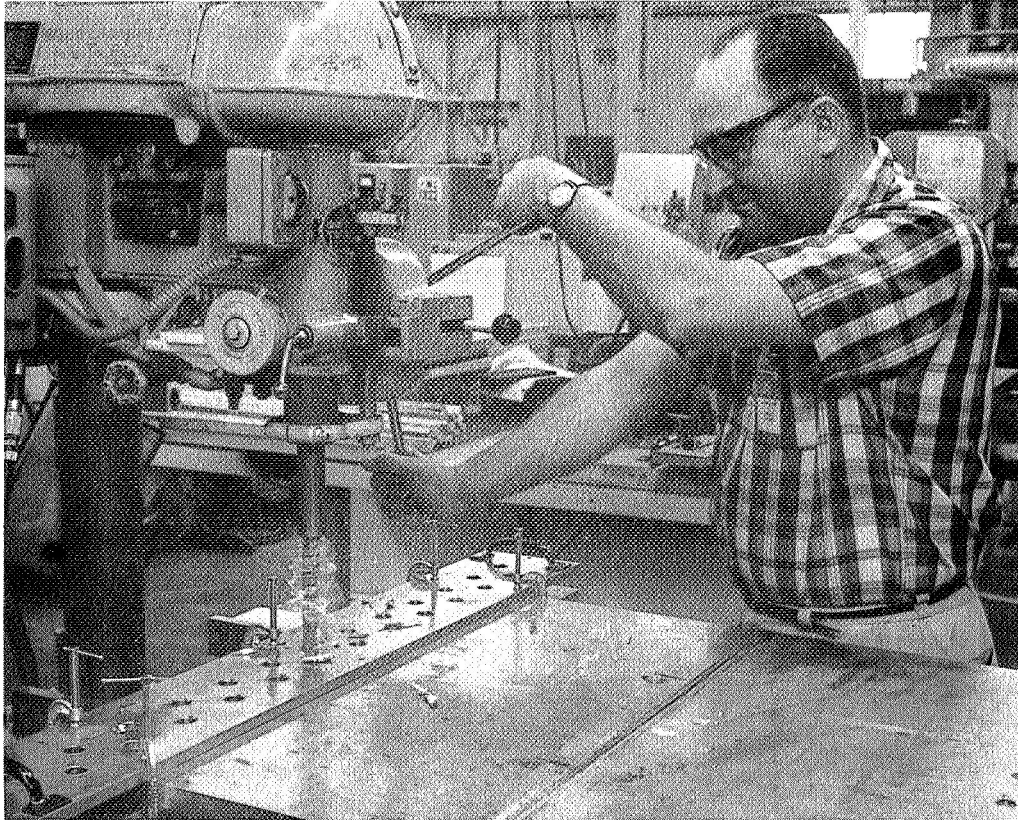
DRILLING LOADING HOLES WITH DRILL JIG
